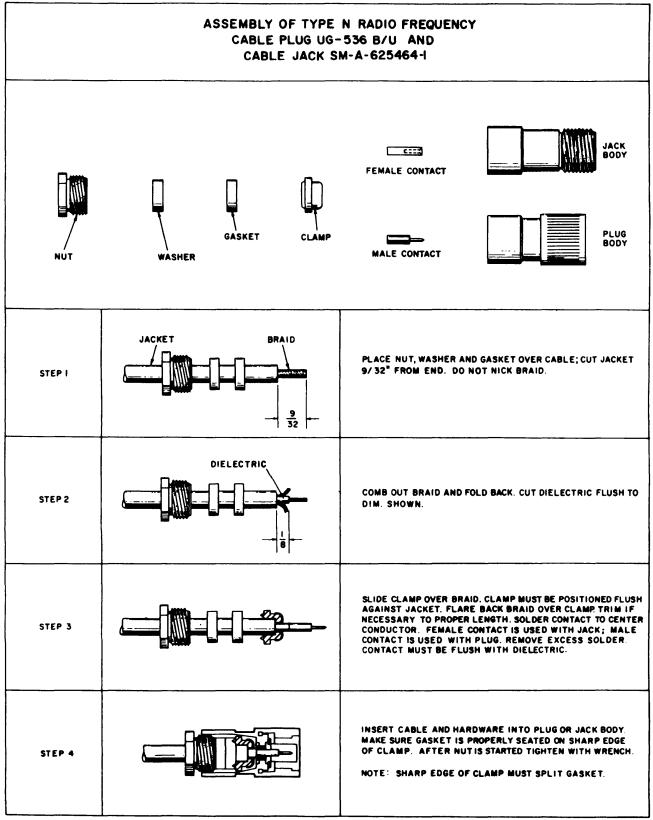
Assembly instructions for type $N\ RF$ cable connectors.
